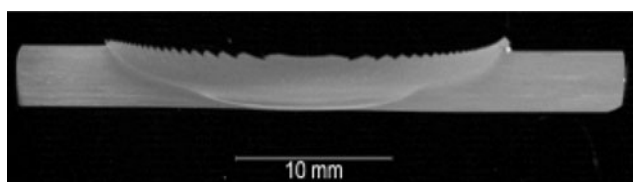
Typical FSW cross section showing gage thickness reduction in weld zone
